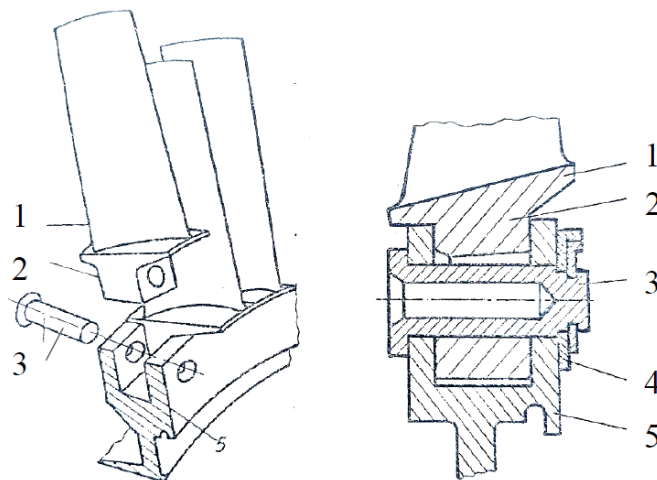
Assembling and fixing the rotor blades by cylindrical pins [4]
